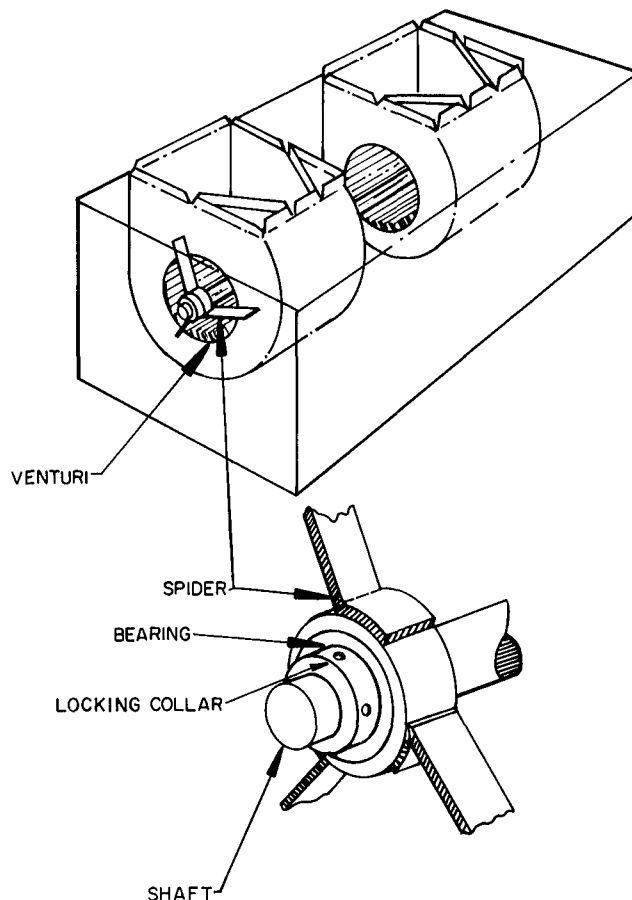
Fan Shaft Bearings — 004, 006, 008, 012, 016, 024
